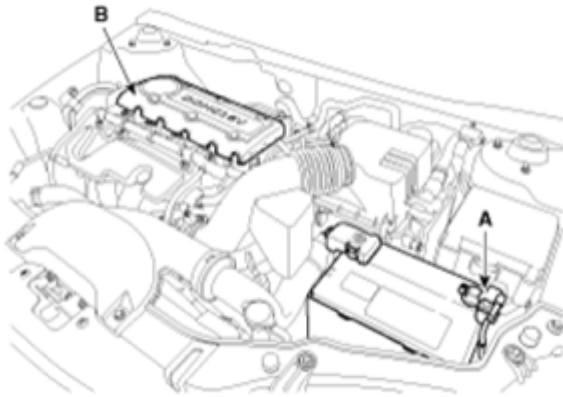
Identifying Engine Cover & Battery Negative Cable
